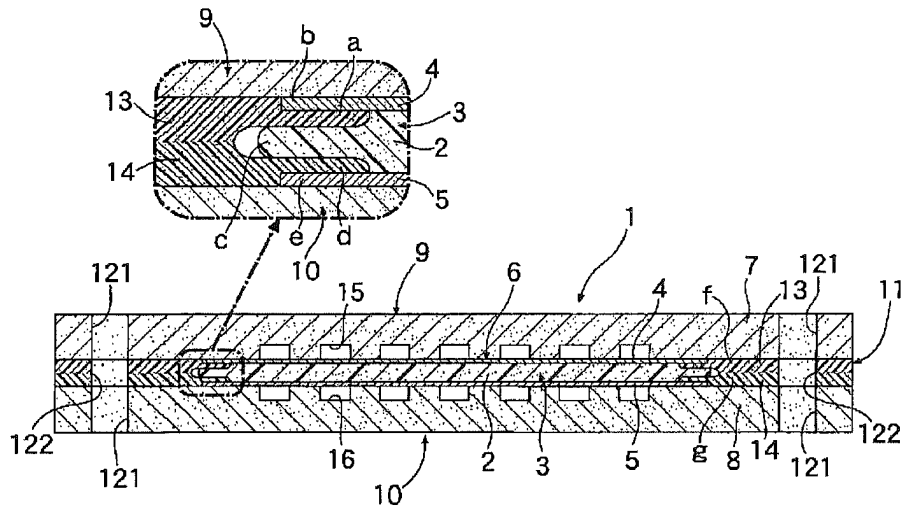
It is an important section expanded sectional view showing the joining structure of a layered product and a sealing member.
